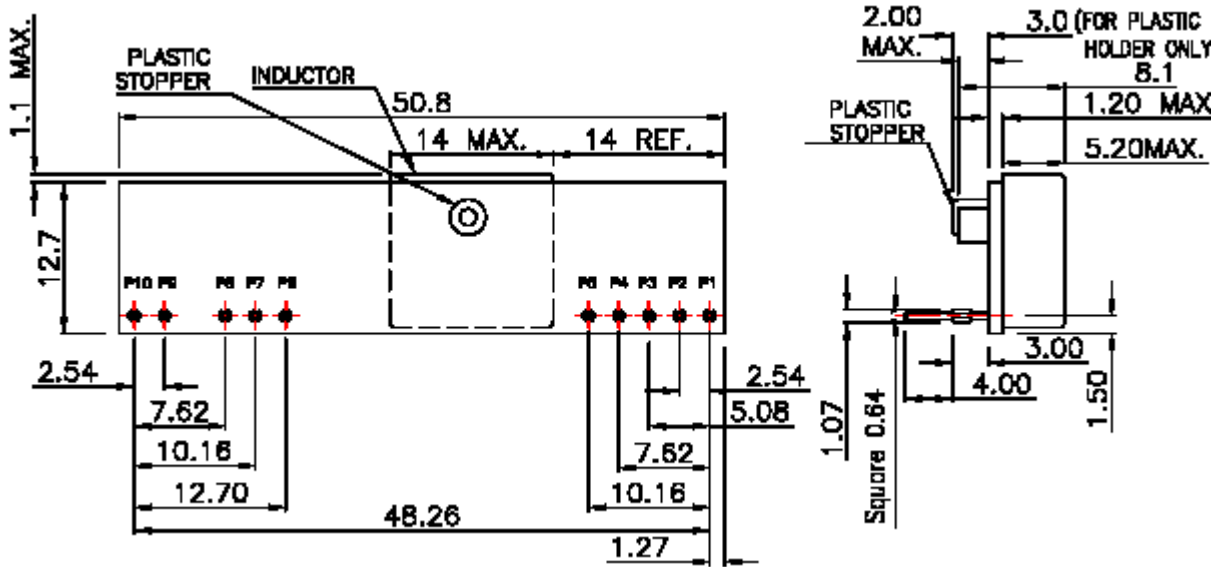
APA18 Mechanical Outline/ Drawing for Horizontal type
